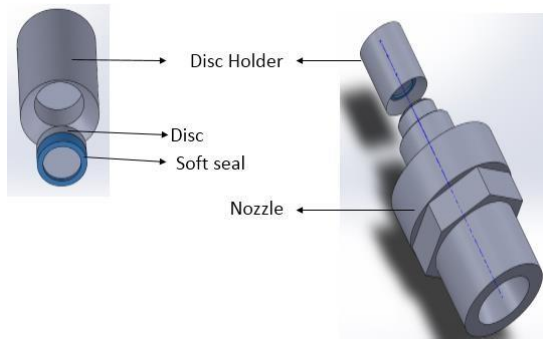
Metal disc with disc holder and nozzle assembly
